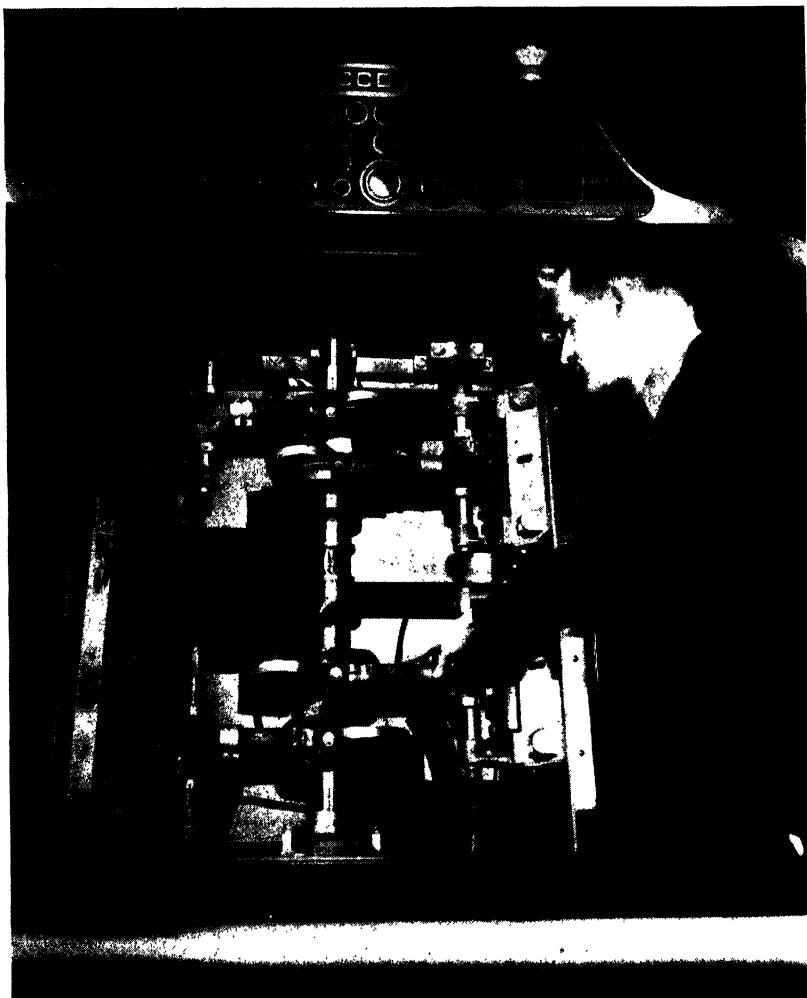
Equipment for inductive heating and quenching of crankshaft bearing surfaces. (Courtesy Ajax Electrothermic Corp.)
